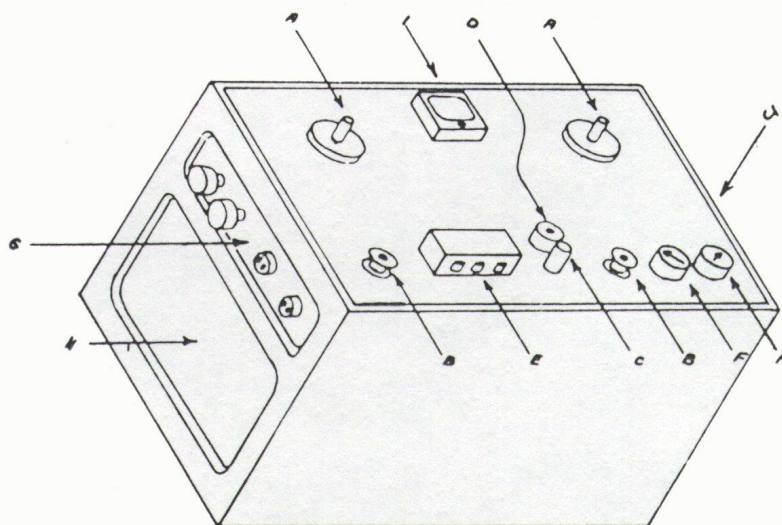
Final layout. A, spool hubs; B, tape guide rollers; C, capstan; D, pinch roller; E, head assembly; F, record-play and meter switches; G, controls; H, microphone compartment; I, level indicator; J, winding handle.
